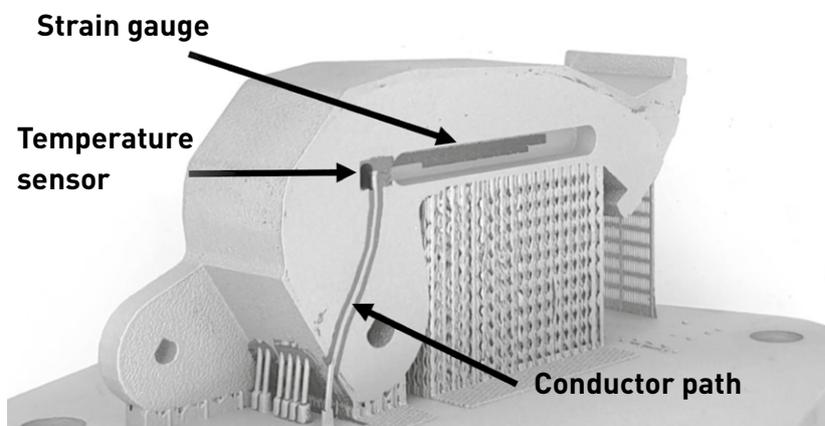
Demonstrator for a sensor-integrated smart part, built on a modified PBF-LB machine, courtesy Fraunhofer IGCV, Augsburg, Germany
